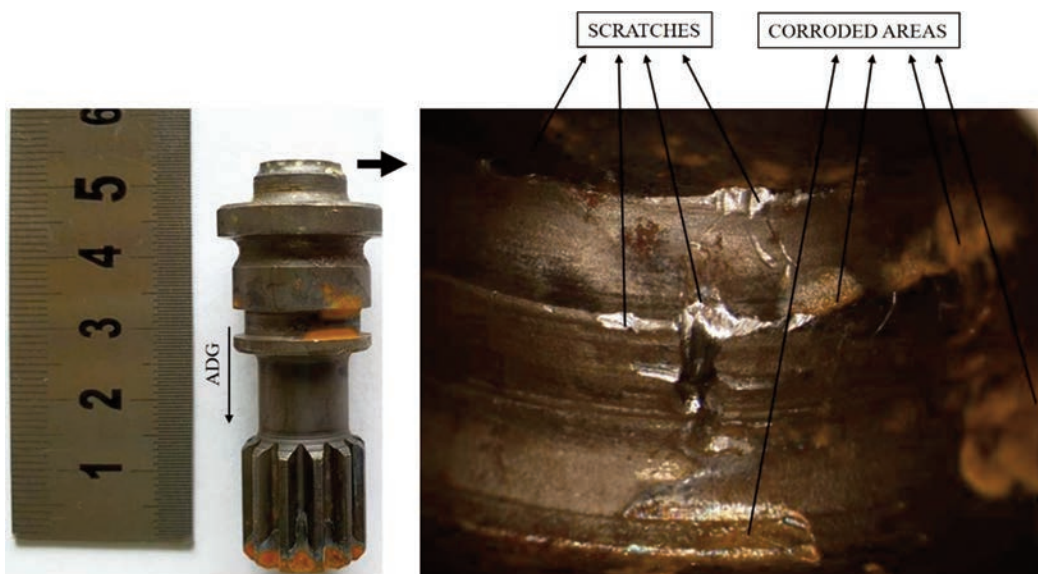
The Fretting and Scratching in the Fracture Zone of Corroded Side of the Shaft
